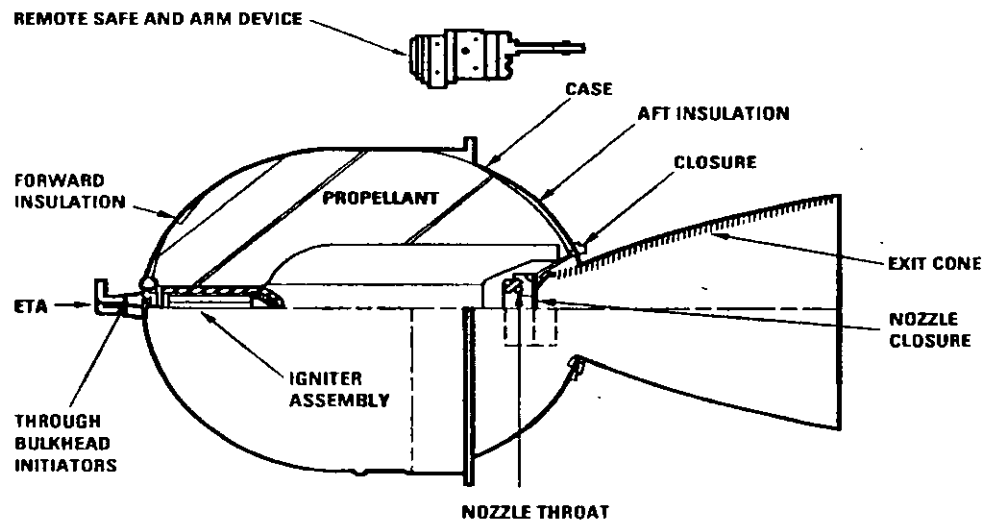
Typical Solid Propellant Rocket Motor. ETA is the Explosive Transfer Assembly.
